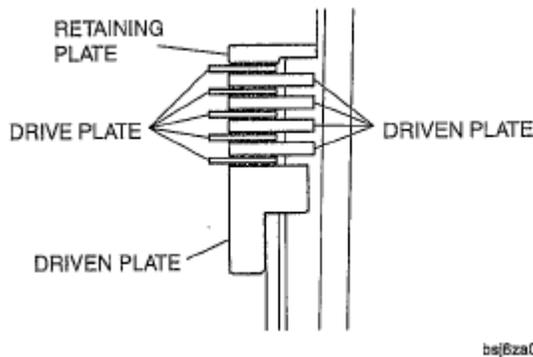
Identifying Retaining Plate, Drive Plates And Driven Plates
